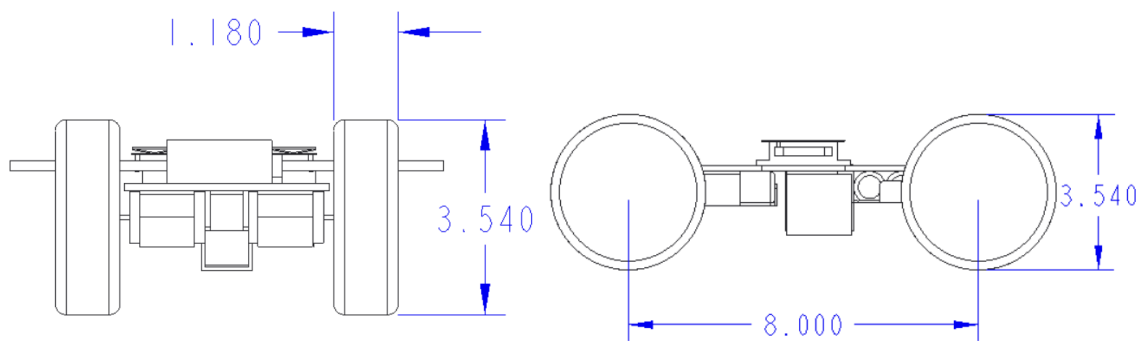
CAD model of the rover including the dimensions of the wheels. Dimensions shown in inches.
